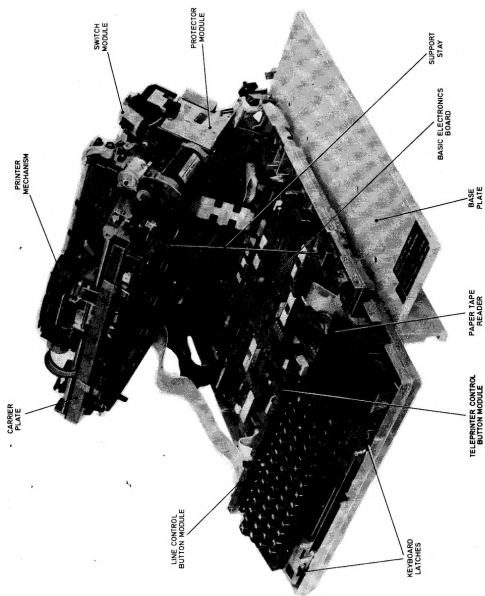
B.1.1 TGN 4 COVER REMOVED CARRIER PLATE LIFTED
